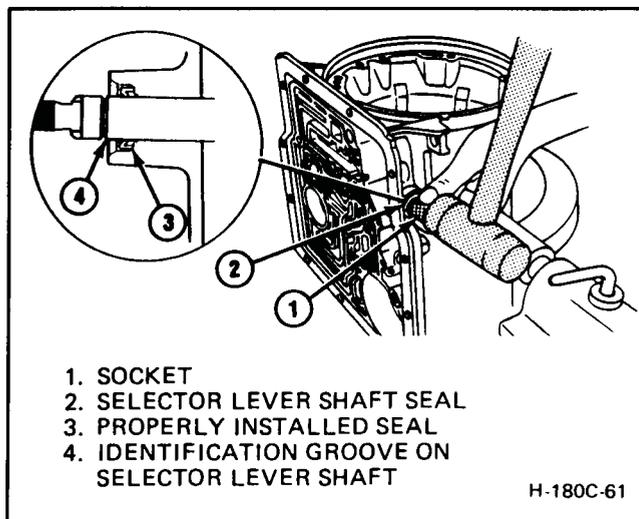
C-33 Selector Lever Shaft Oil Seal Installation
